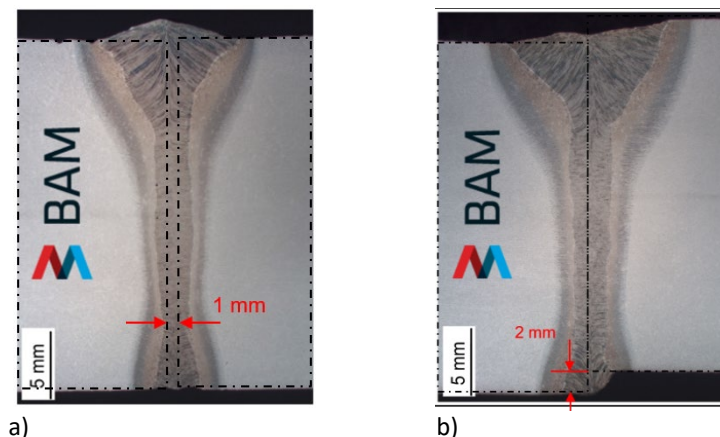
Cross sections for hybrid laser-arc welded 25 mm thick plates: (a) 1 mm gap; (b) 2 mm edge offset
